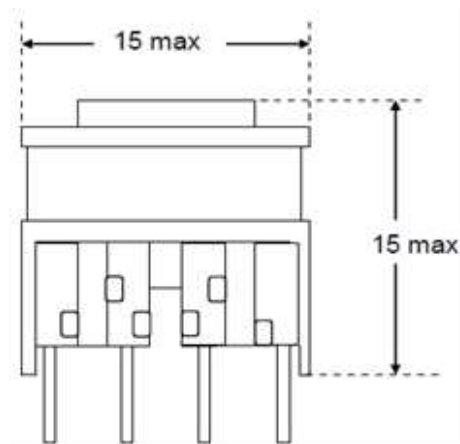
Dimensional drawing and pin placement diagram - side view 2
